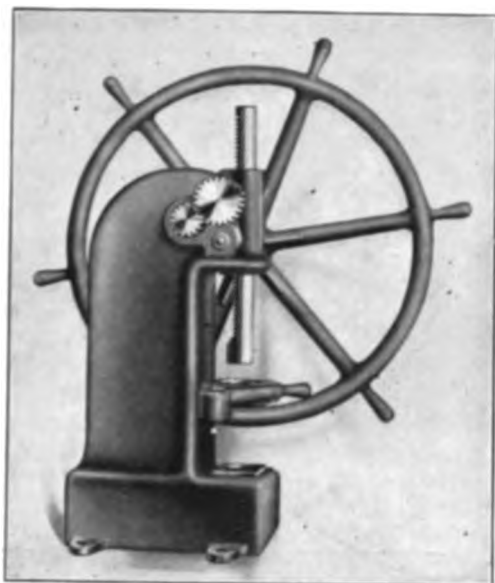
ASSEMBLING BENCH ARBOR PRESS
